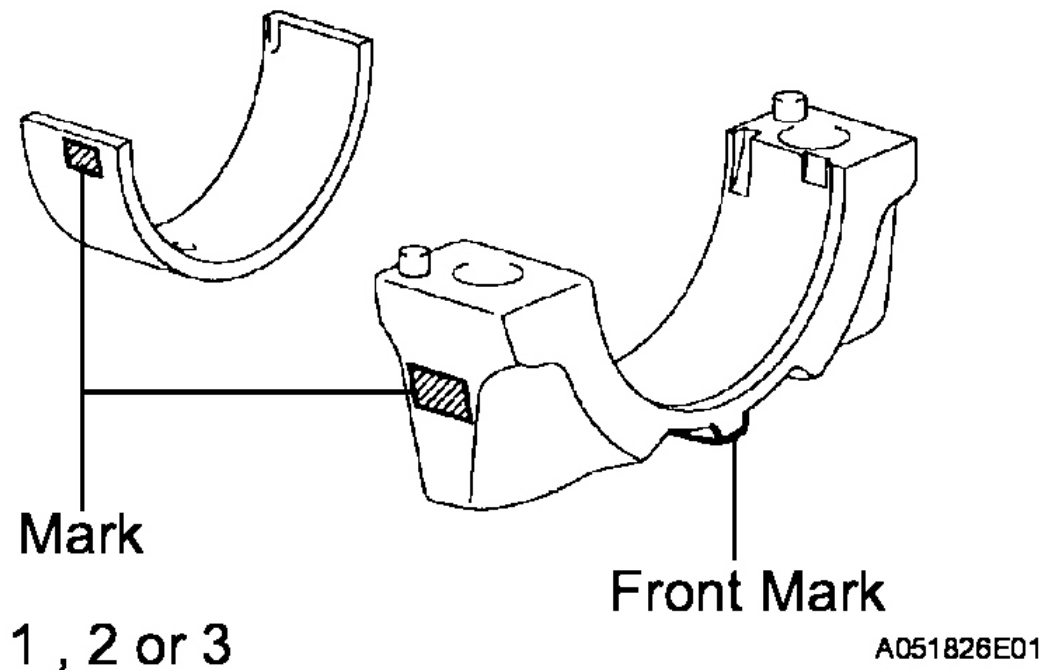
Identifying Mark On Connecting Rod Cap And Bearing
